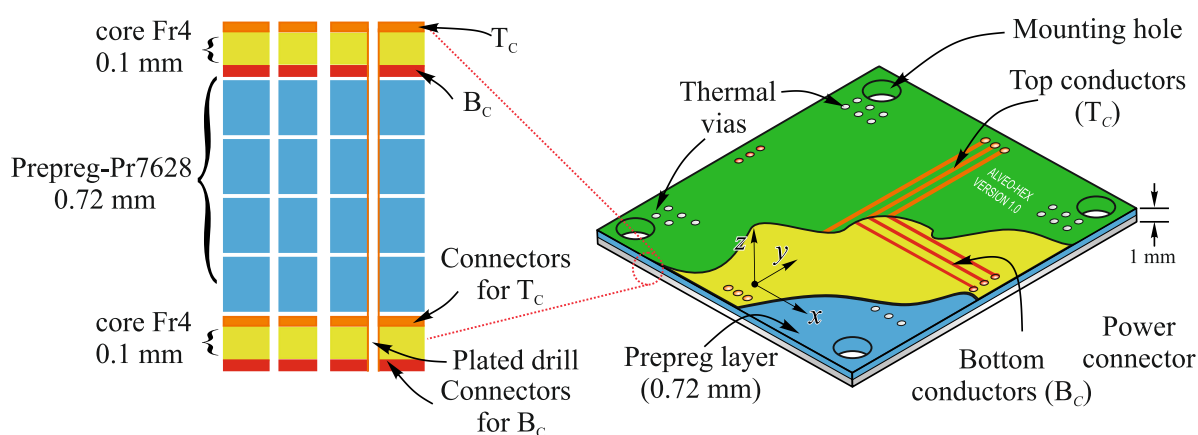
Buildup design of the Printed Circuit Board (PCB)
